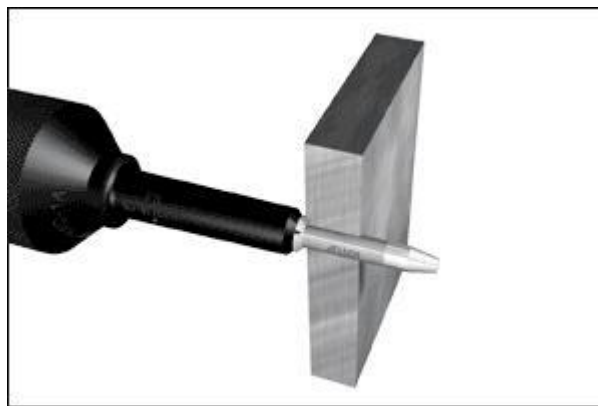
Cold Expansion Process. Mandrel Being Drawn through the Sleeve and the Hole (Fatigue Technology 2011)
